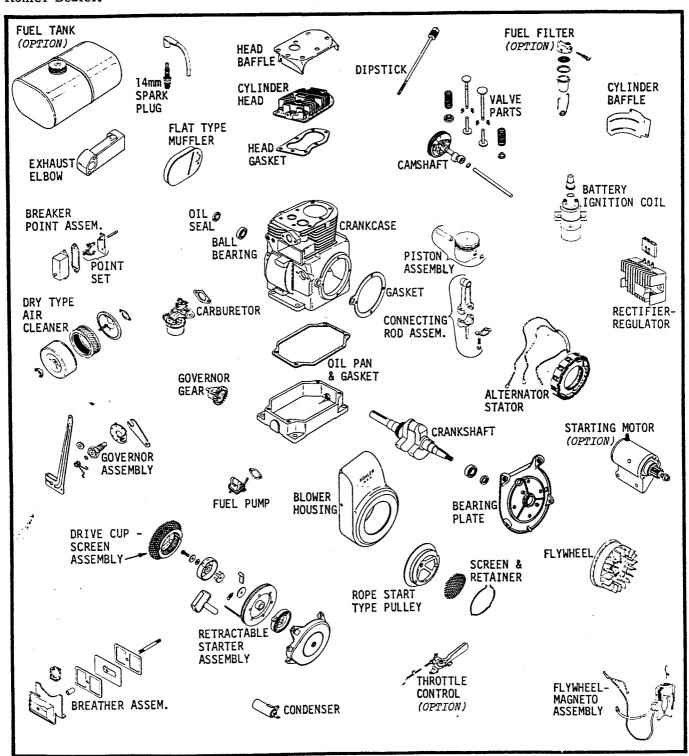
PARTS IDENTIFICATION - EXPLODED VIEW
